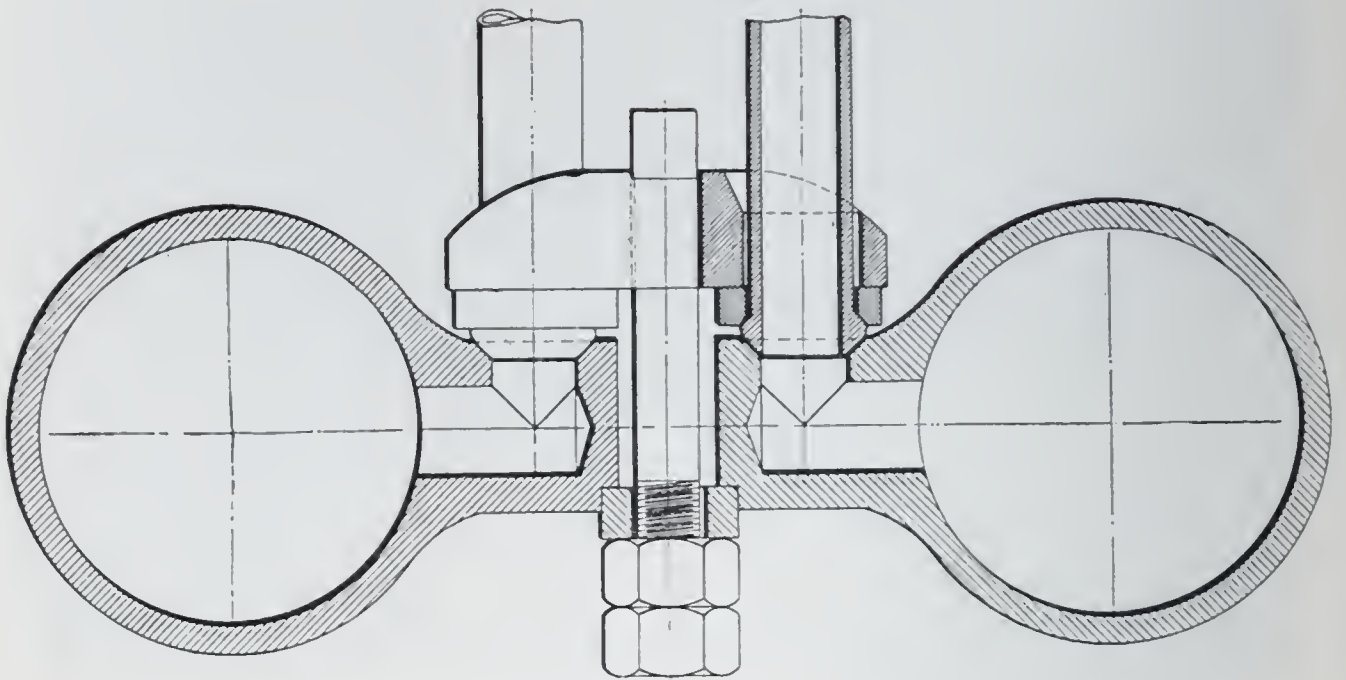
"Elesco" Superheater Header, Showing Tube Connection.
